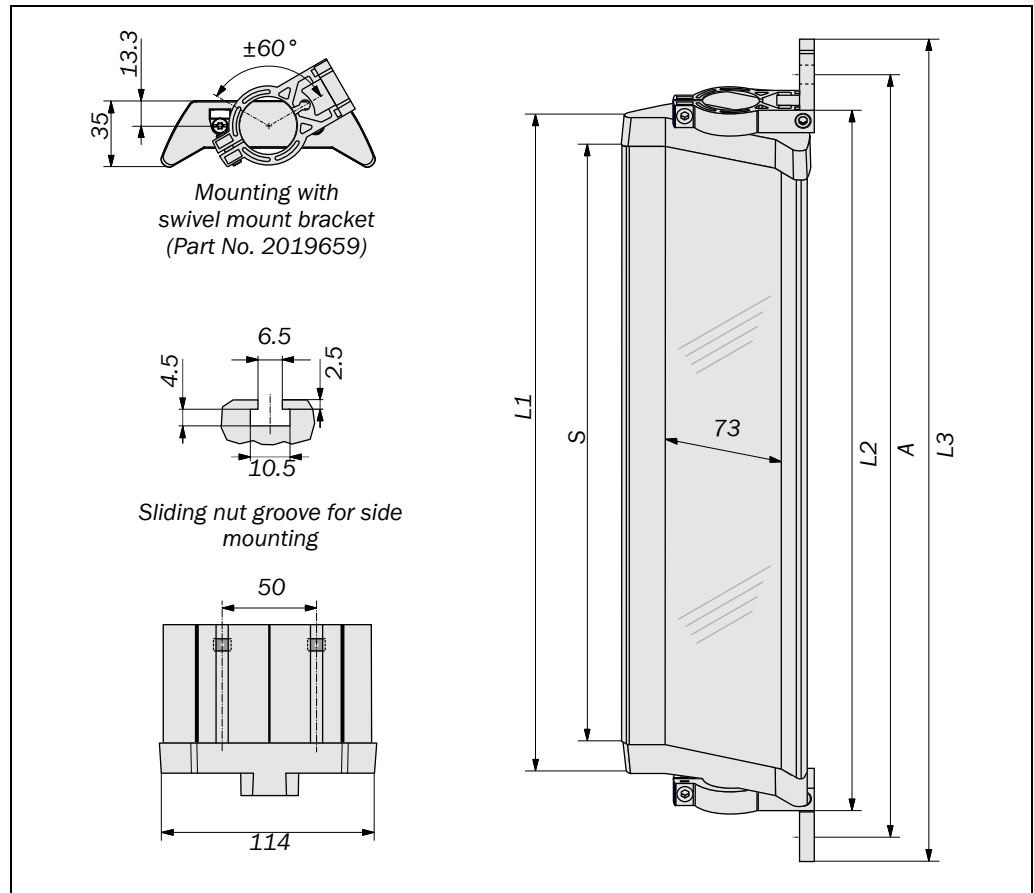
Dimensional drawing C-Fix-Flex bracket, pivoting (mm)
